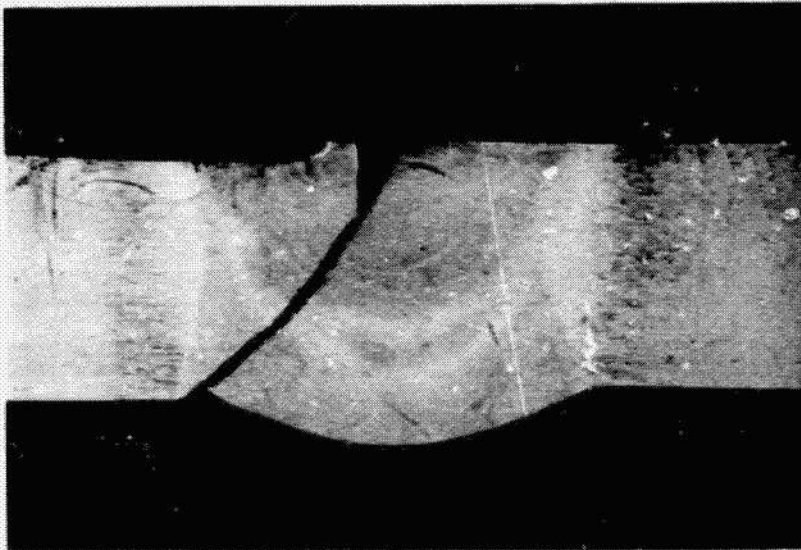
TIG weld fracture-no heat sink (x5).
